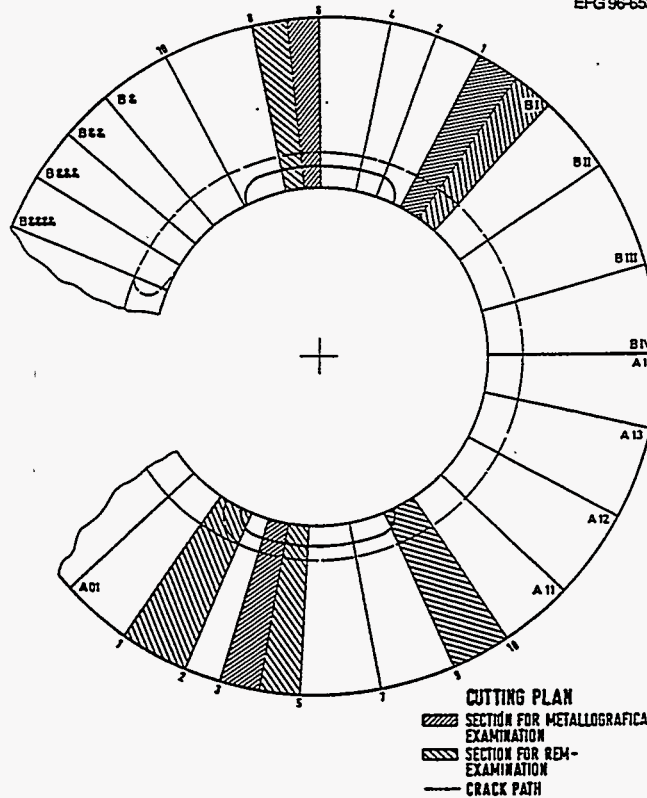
Arrested configuration of crack front in NKS-5 experiment, along with the cutting plan for posttest sectioning of test specimen
